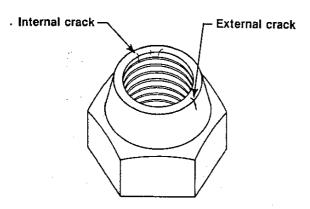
TYPICAL LOCKING ELEMENT CRACKS IN PREVAILING-TORQUE NUTS
